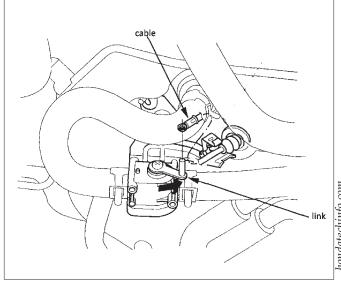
Most heater coolant valves can be externally checked to see if linkage moves and hoses can be felt to determine if valve is opening or closing.
